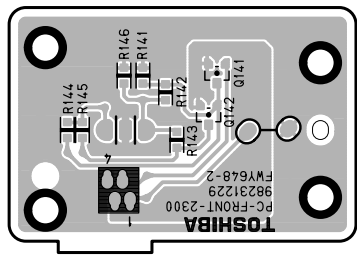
EU04 Power Switch PC Board (Bottom side)
